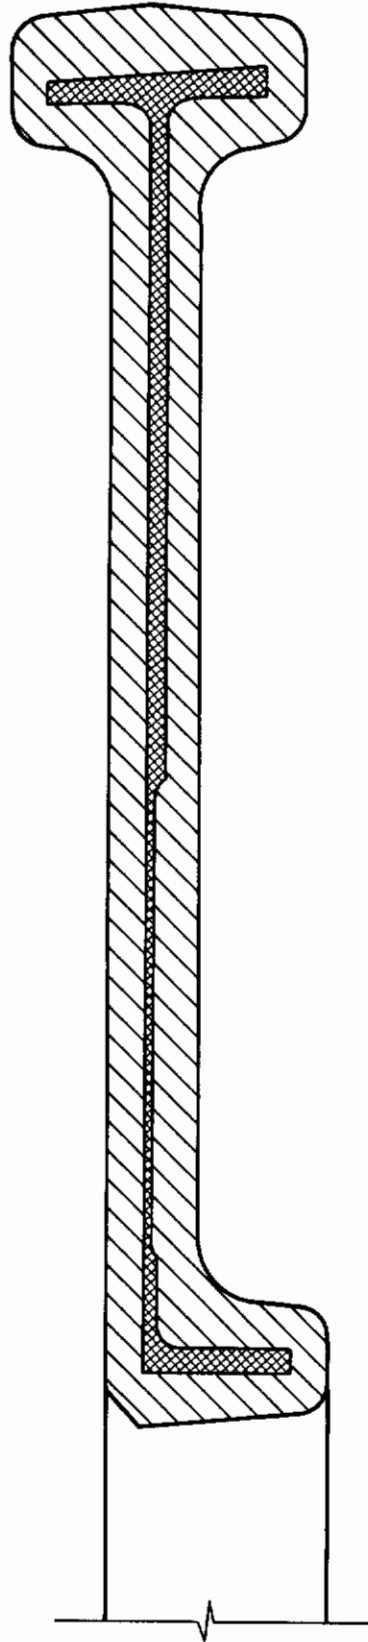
Illustration of Bulkhead Longitudinal Section (at one end) with Target Finish Forged Shape for 50,000 Ton Hydraulic Press Superimposed. Approximately Six-Tenths Scale.
